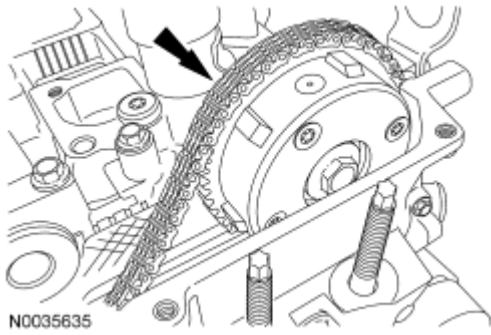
Locating Timing Chain On Intake Camshaft Drive Gear
